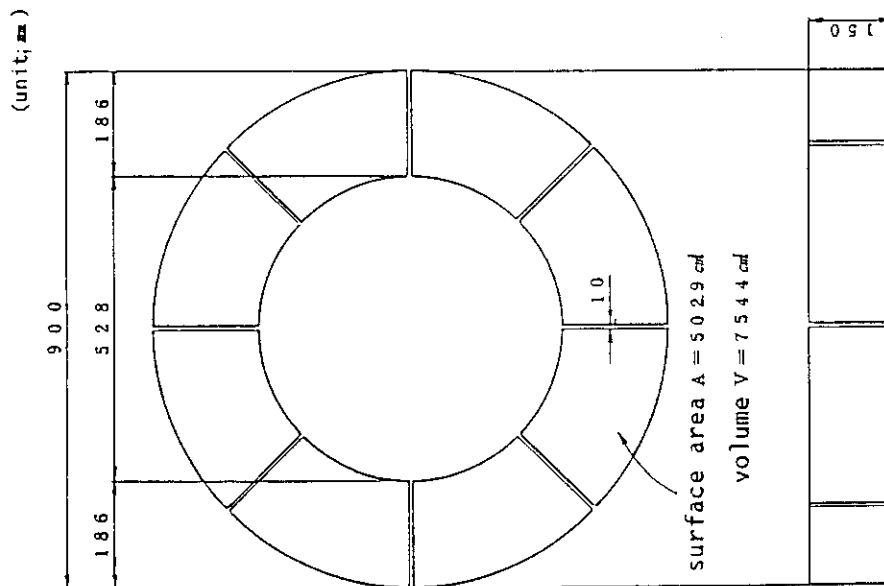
Example of trimmed blocks of compacted bentonite/sand mixture for use in a heater hole
